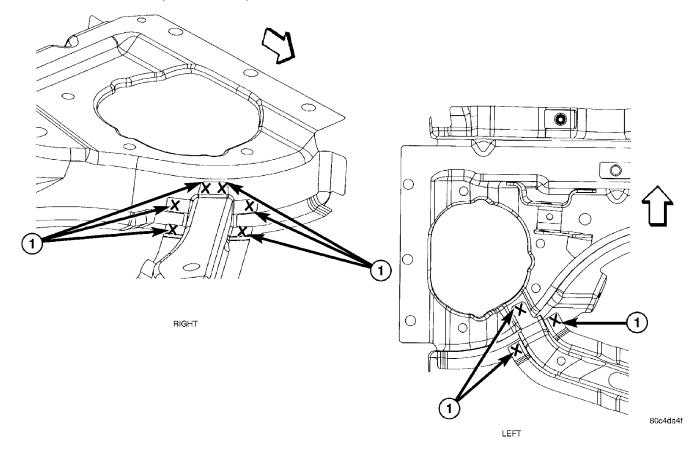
REAR FLOOR PAN, REAR CROSSMEMBER TO REAR SUSPENSION AND FUEL TANK CROSSMEMBER
